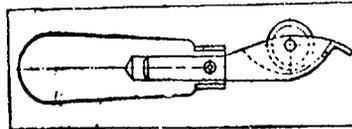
Tool for Installation of Rubber Sealing Strip in Slot of ZIL-130 and ZIL-131 Windshield Gasket
